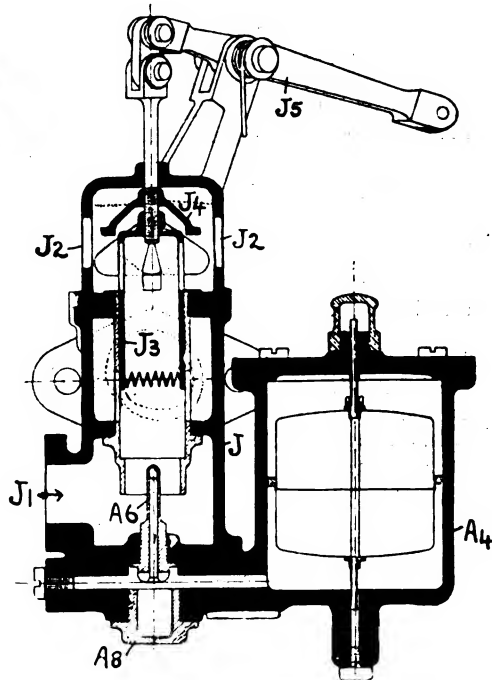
Sectional drawing showing the construction of the De Dietrich Carburettor.
